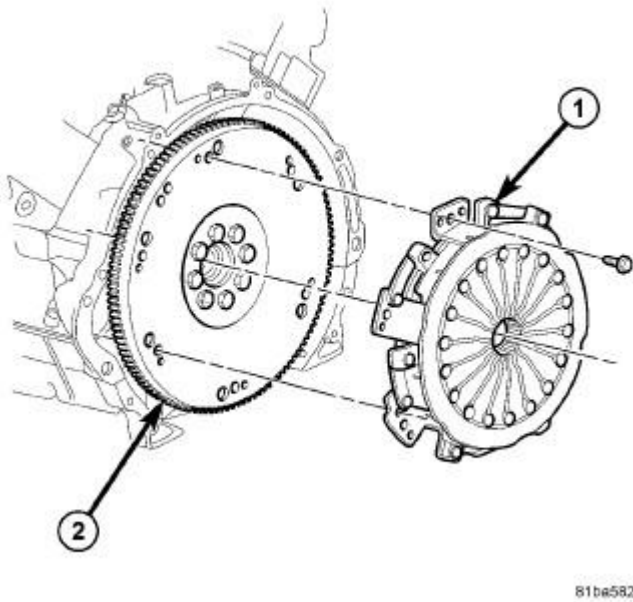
PRESSURE PLATE AND FLYWHEEL
